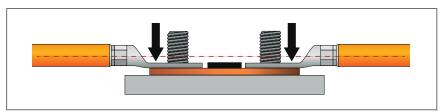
HV BM 1.2, power cables HV- (≤35 mm²), placing the shunt module and the ring terminals on the threaded bolts
